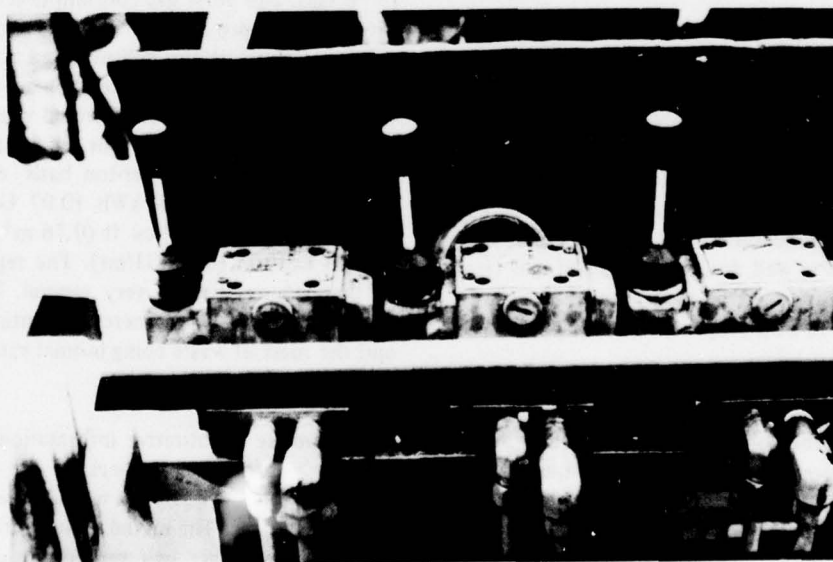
Hydraulic control valves at operator station to drive auger, feed conveyor, and ash conveyor.
